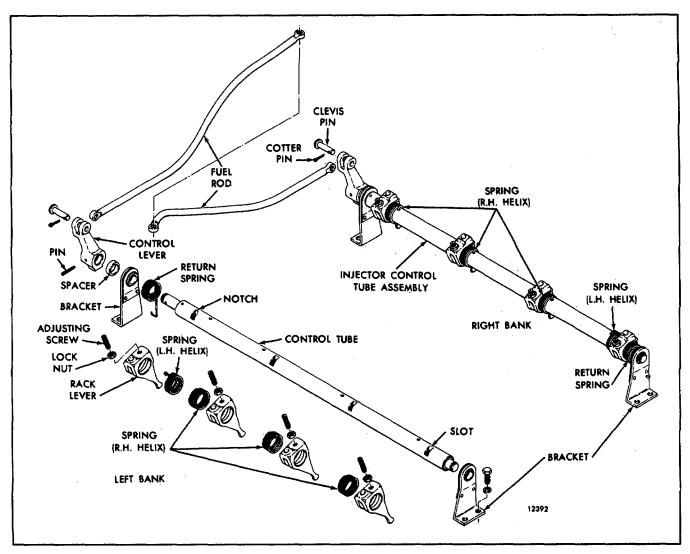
FIG. - Injector Control Tube Assemblies (Spring-Loaded)
